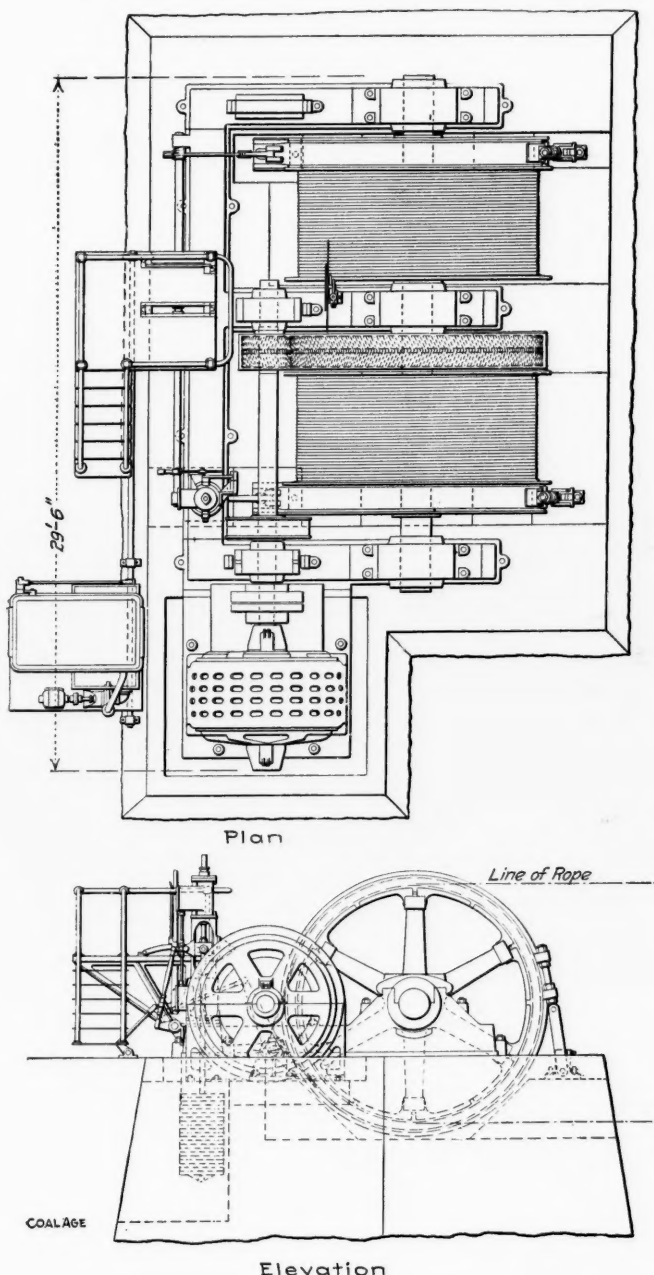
PLAN AND ELEVATION OF HOIST AND MOTOR
